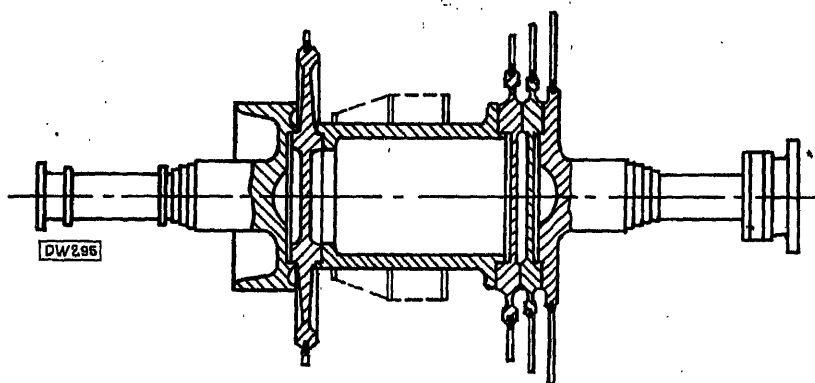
S.S.W.*, rotor of a single-casing high-pressure turbine of the *S.S.W.-Roeder* type
